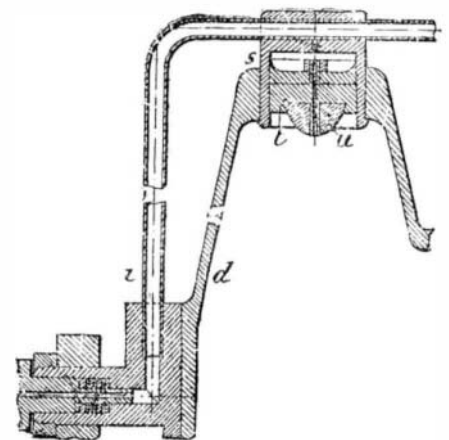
CHARGING APPARATUS FOR MORE THAN ONE BOTTLE.
